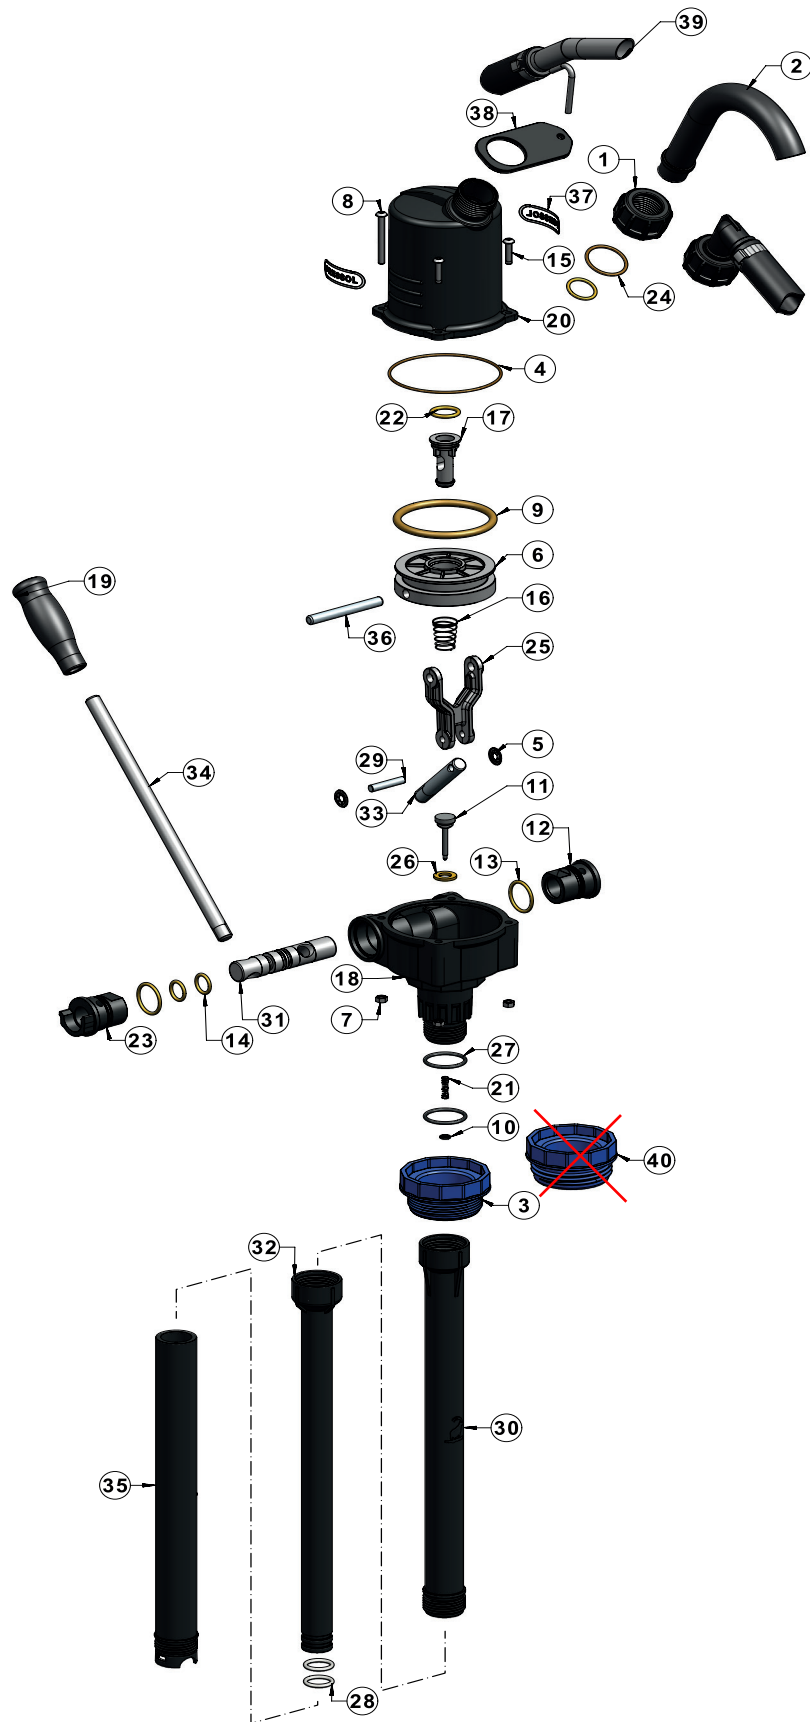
Exploded view of the barrel pump for diesel and heating oil with discharge spout
